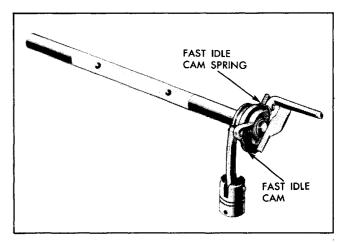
B-32 Choke Piston, Shaft and Fast Idle Cam Assembly—Carter
